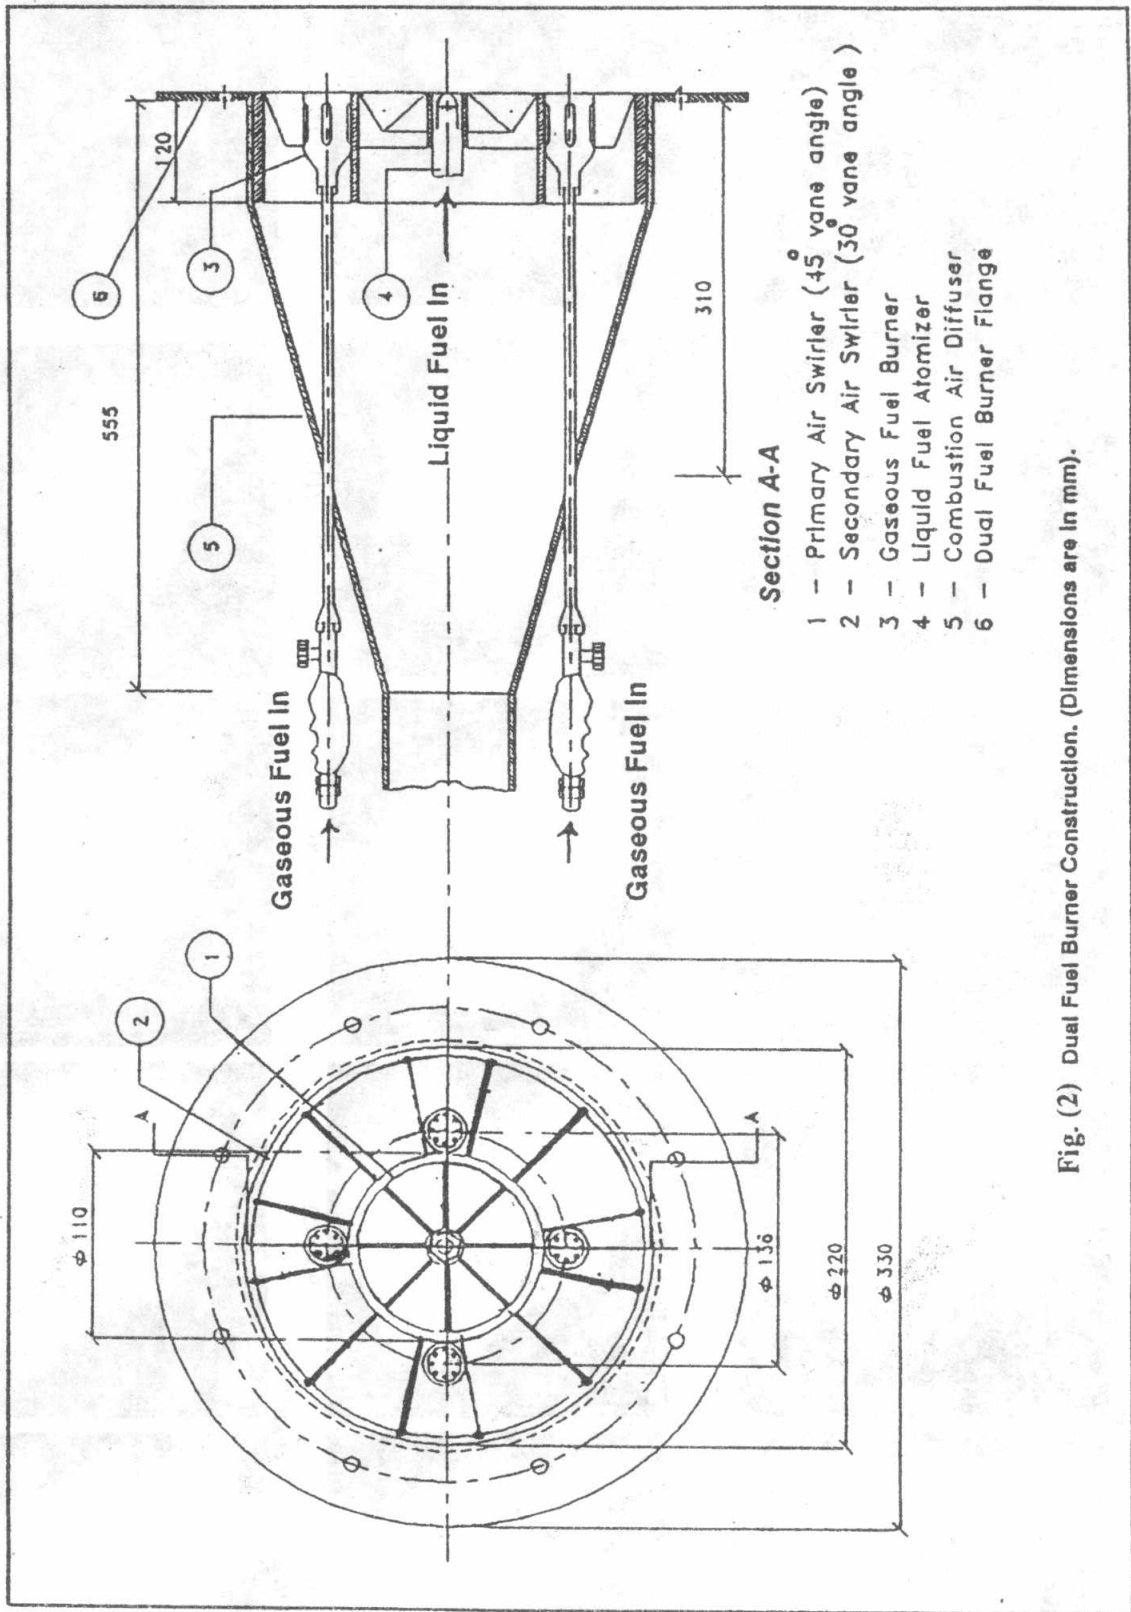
Dual Fuel Burner Construction. (Dimensions are in mm).
